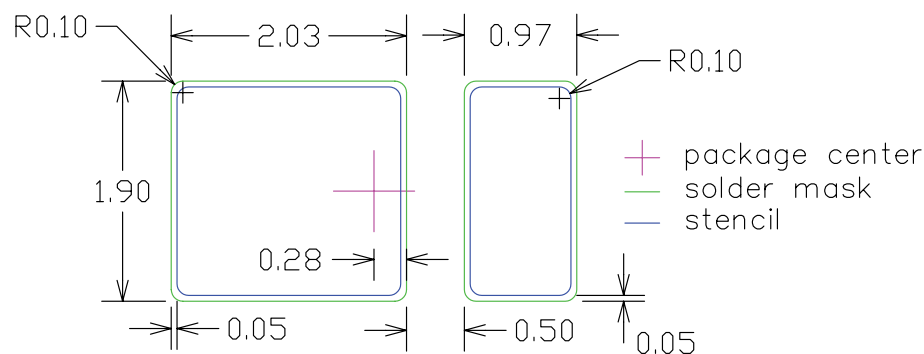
Recommended PCB footprint design for the LUXEON 2835 Line (dimensions are in millimeters).
